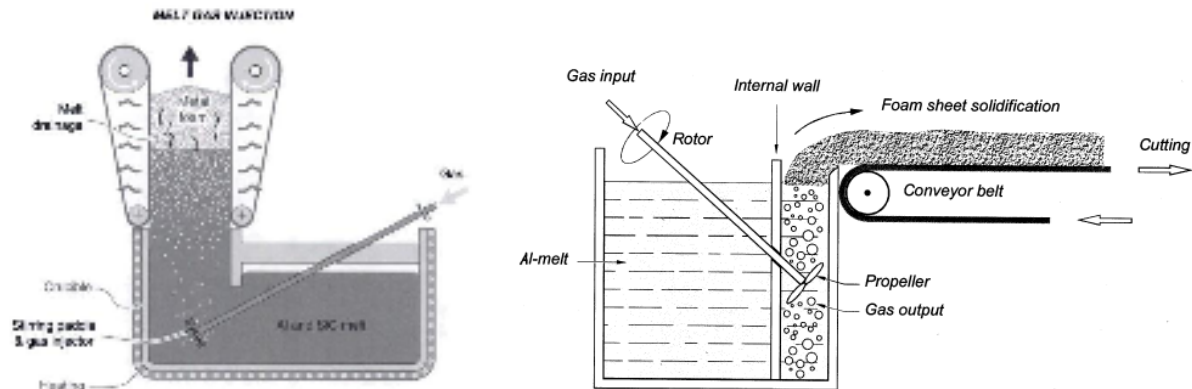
Injection gas manufacturing for producing Al foam using (i) vertical [15] and (ii) horizontal [12] conveyor belts.
